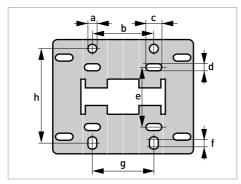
Dimensions of mounting plate of wall-mounted housing
